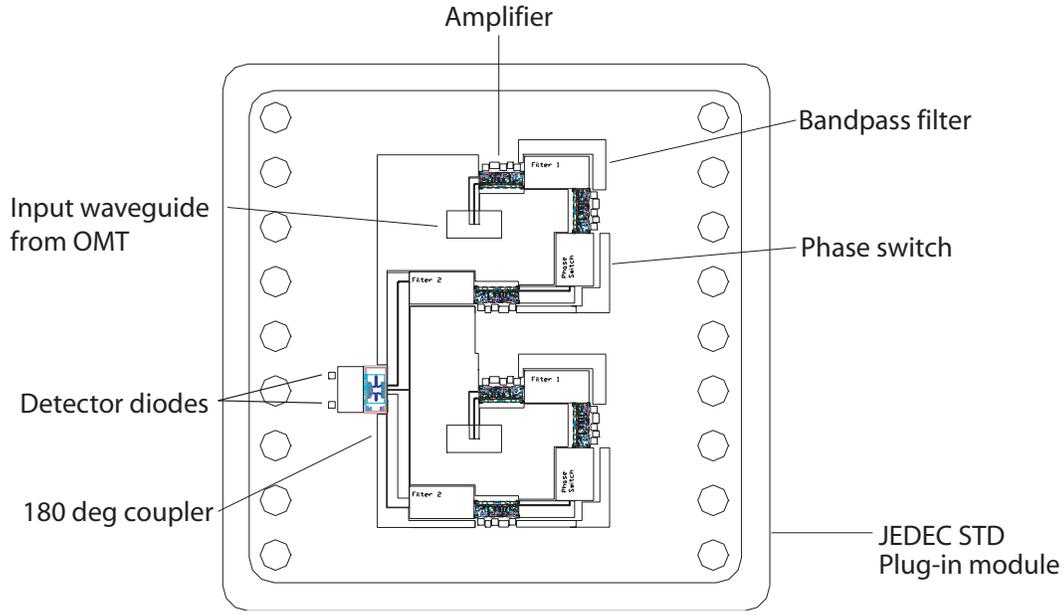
Layout of polarimeter module in package. Placement of parts will be done by hand for small numbers, by automated equipment for large numbers.
